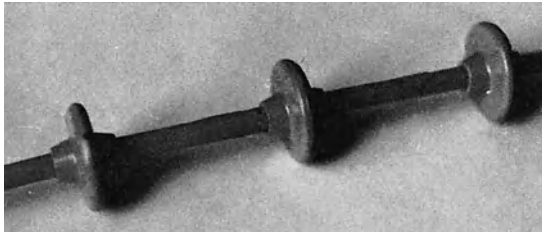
Conveying cable with plastic conveyor plates for mechanical pipe conveyor system
